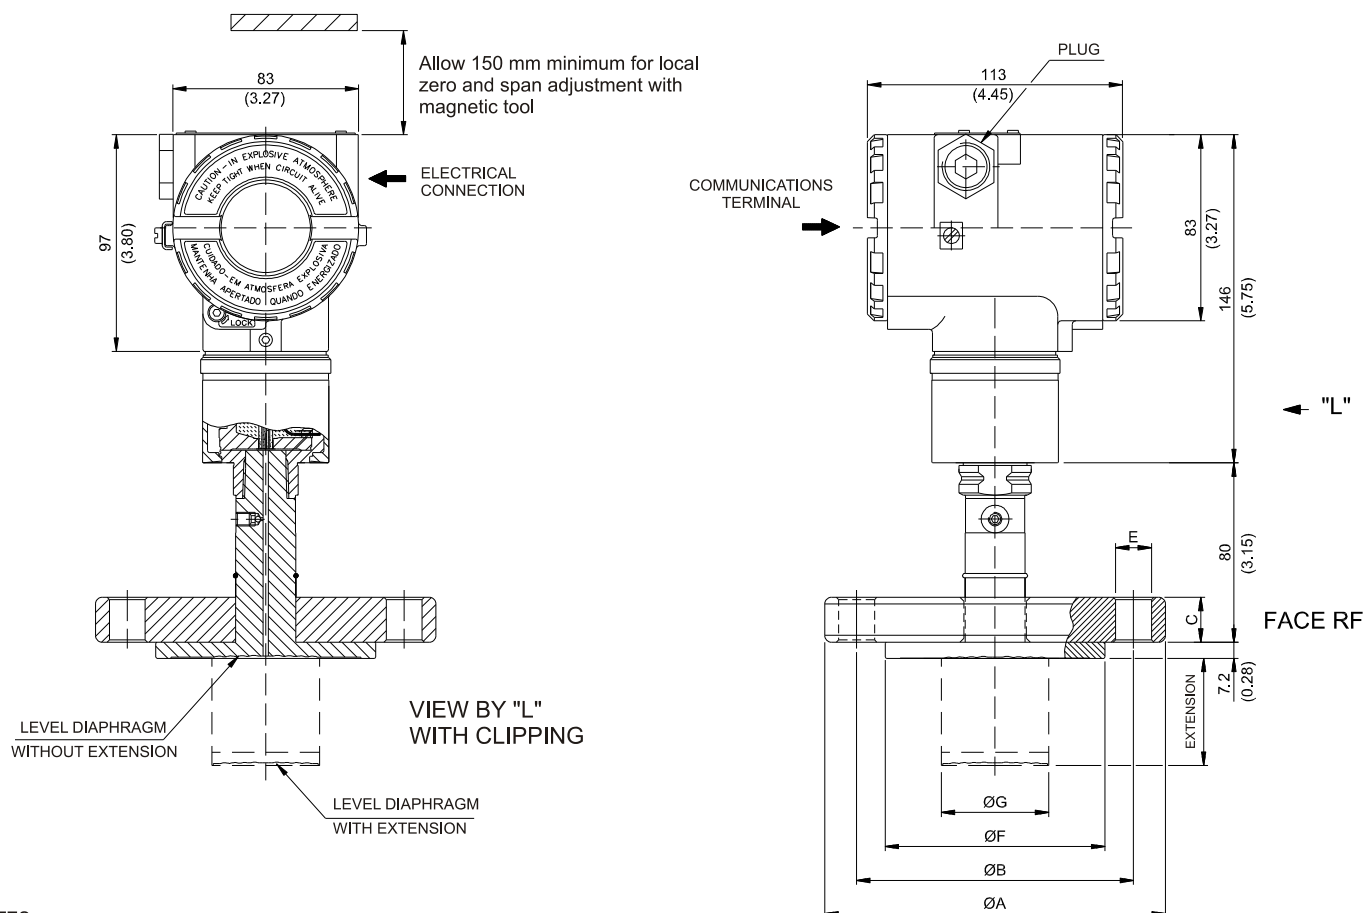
(b) – Dimensional Drawing and Mounting Position for LD290 - Sanitary
